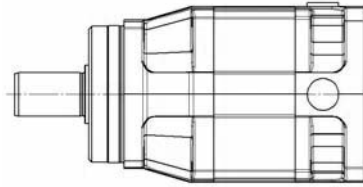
Example of a PS.C.. planetary servo gear unit with ECH.. adapter
